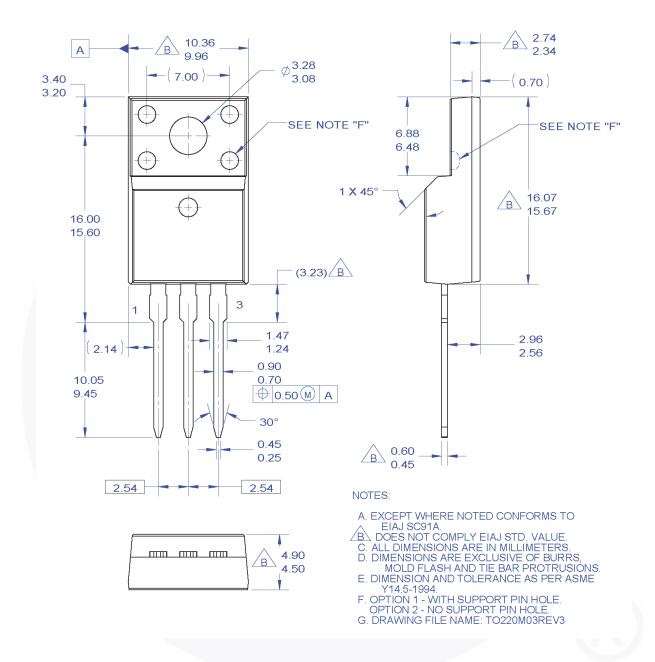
TO220, Molded, 3LD, Full Pack, EIAJ SC91, Straight Lead
